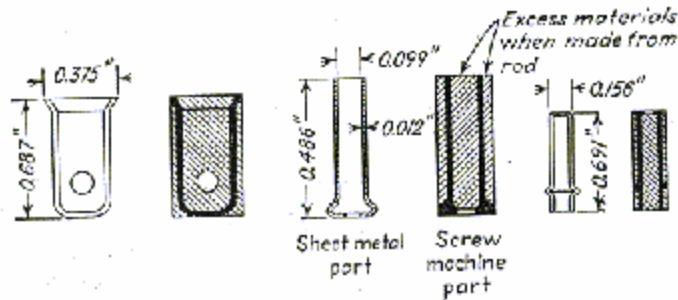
Typical screw-machine parts and a similar part produced on the eye let machine
